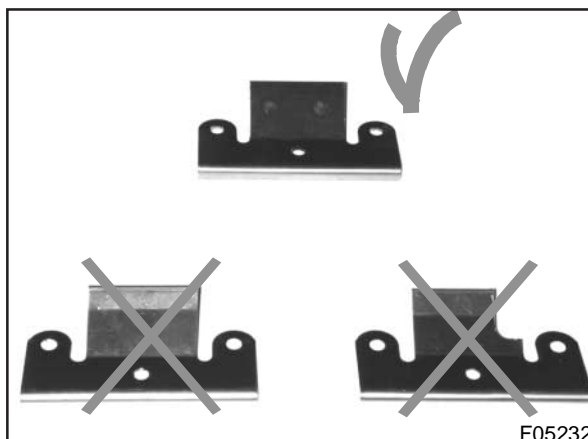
Double-latch type (top) catches are OK. Single-latch type (bottom left) and single or double-latch modified catches (bottom right) need to be replaced.
